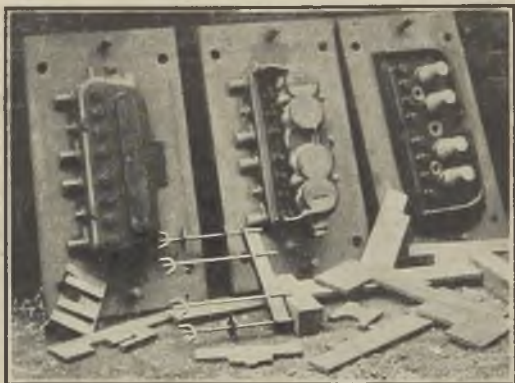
A SET OF PATTERN PLATES, CORE GAUGES, ETC., FOR 4-BORE CYLINDER.
